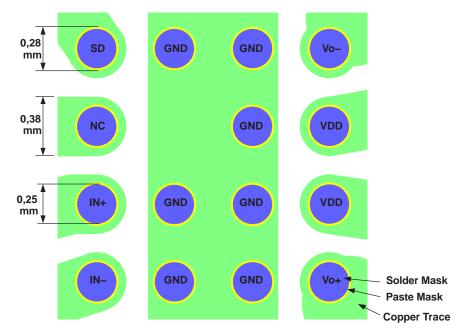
TPA2005D1 MicroStar Junior BGA Board Layout (Top View)
